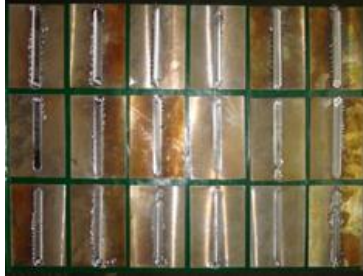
Photographs of the part of the joint specimens fabricated by FSW using the three different tool profile and various rotational speeds.
